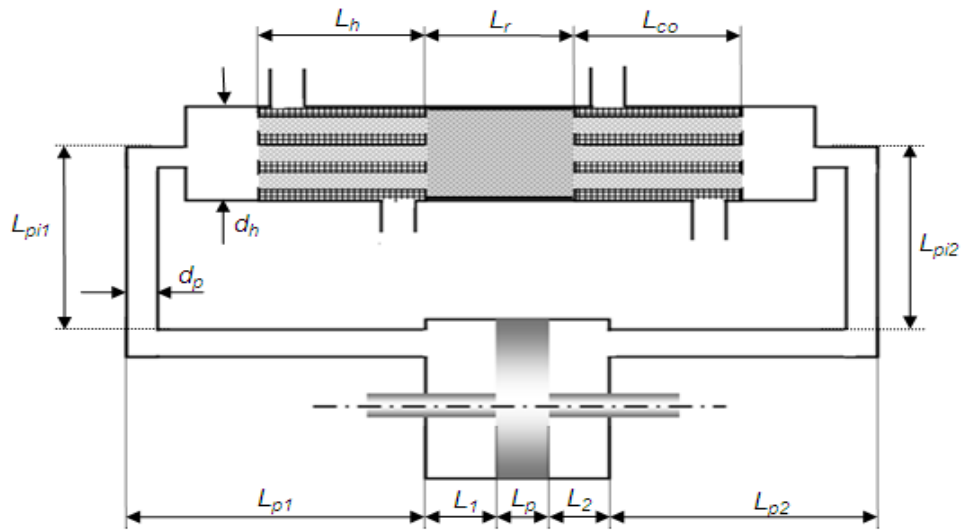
Stirling engine heat exchanger geometrical dimensions
